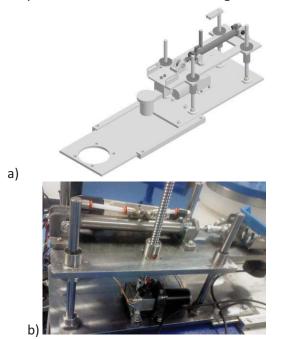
Mini-platform after improvements: a) 3D model; b) completed assembly
